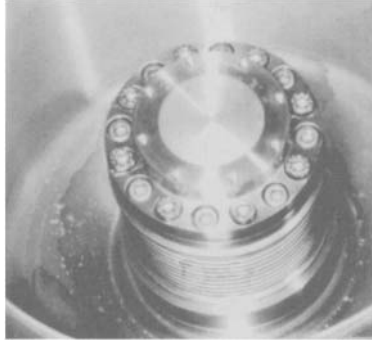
Photographs of the corrosion points in tritium installations observed during maintenance or in dismantling. Plate 4: formation of oxide deposits and corrosive substances in the body of a turbomolecular pump that induced pitting corrosion.
